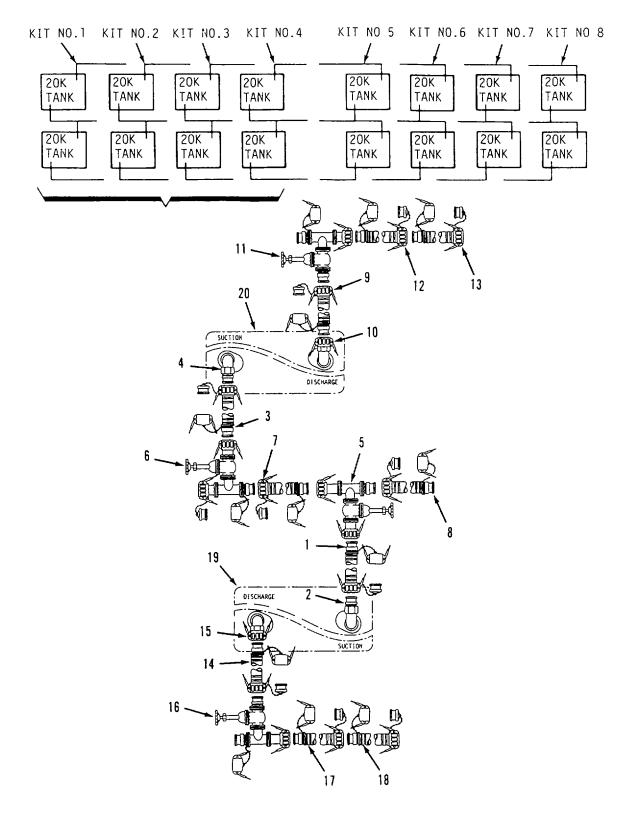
Dual Tank Connection Kit Disassembly (Sheet 1 of 2).
